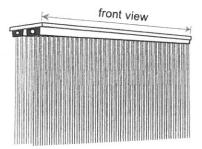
/4" x 2" (spot weld mount) 1/4" x 4" (bolted mount)
